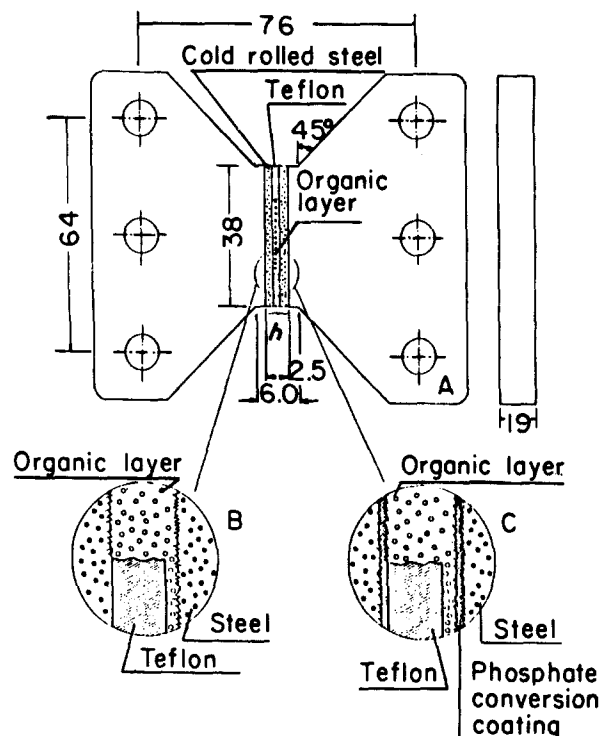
The crosslinked specimen and mounting for pure shear testing: (A) specimen mounted in holder; (B) detail of SL specimen; (C) detail of SPL specimen.
